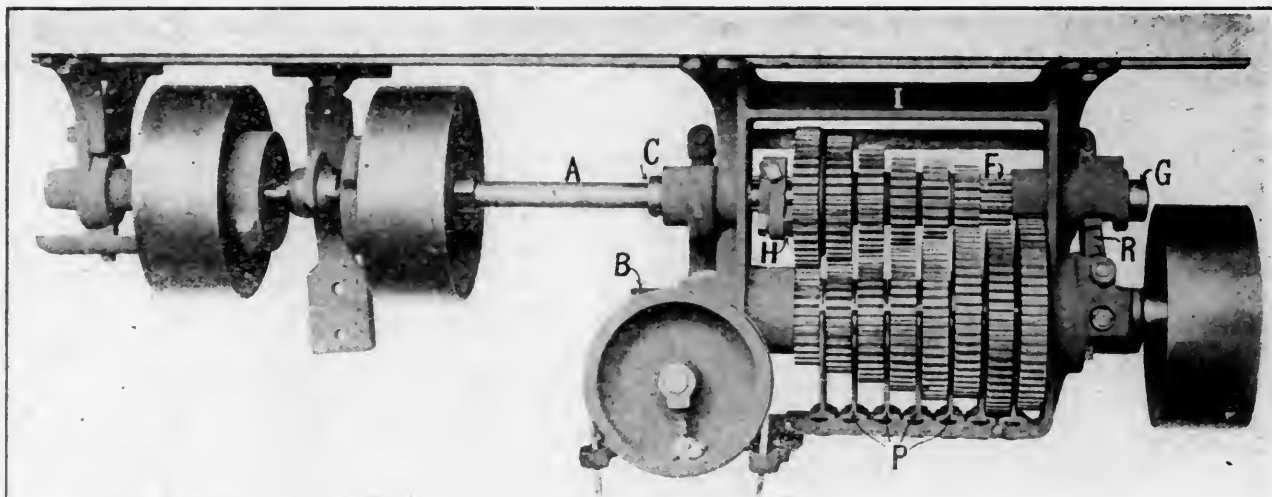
REAR VIEW WITH COVERS REMOVED, SHOWING ROPE SHEAVE FOR SHIFTING SLIDING CONE.
